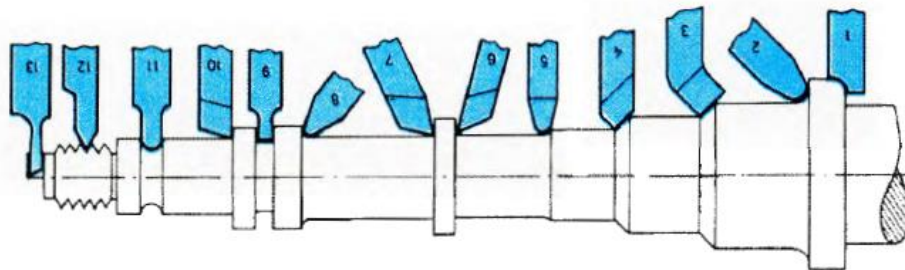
A stepped shaft after machining on a standard diameter commercially available cylindrical shaft. [2]
